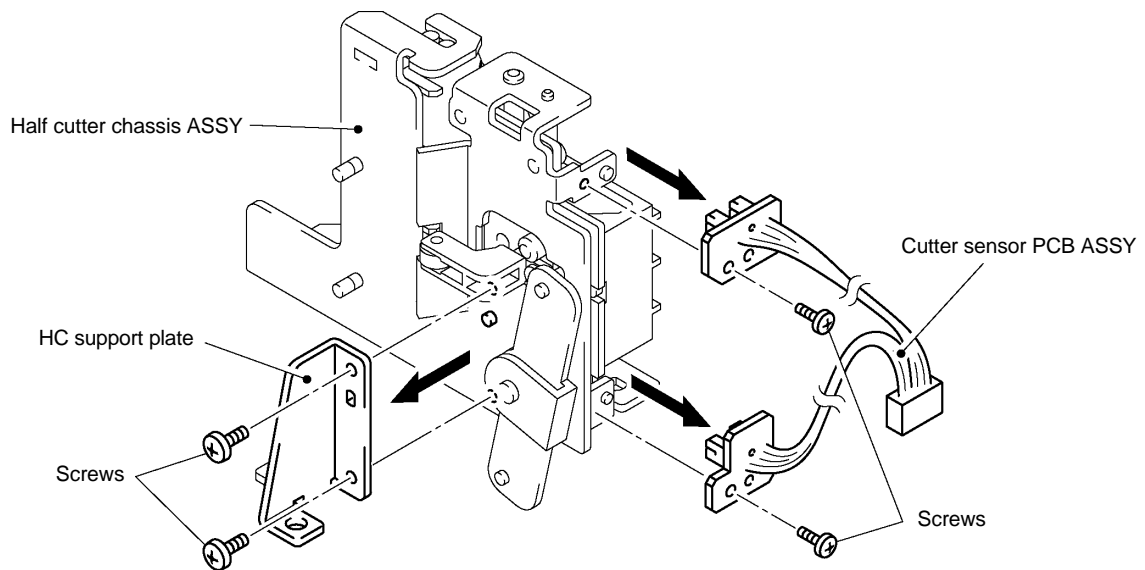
Removing the Half Cutter Chassis ASSY (2)
